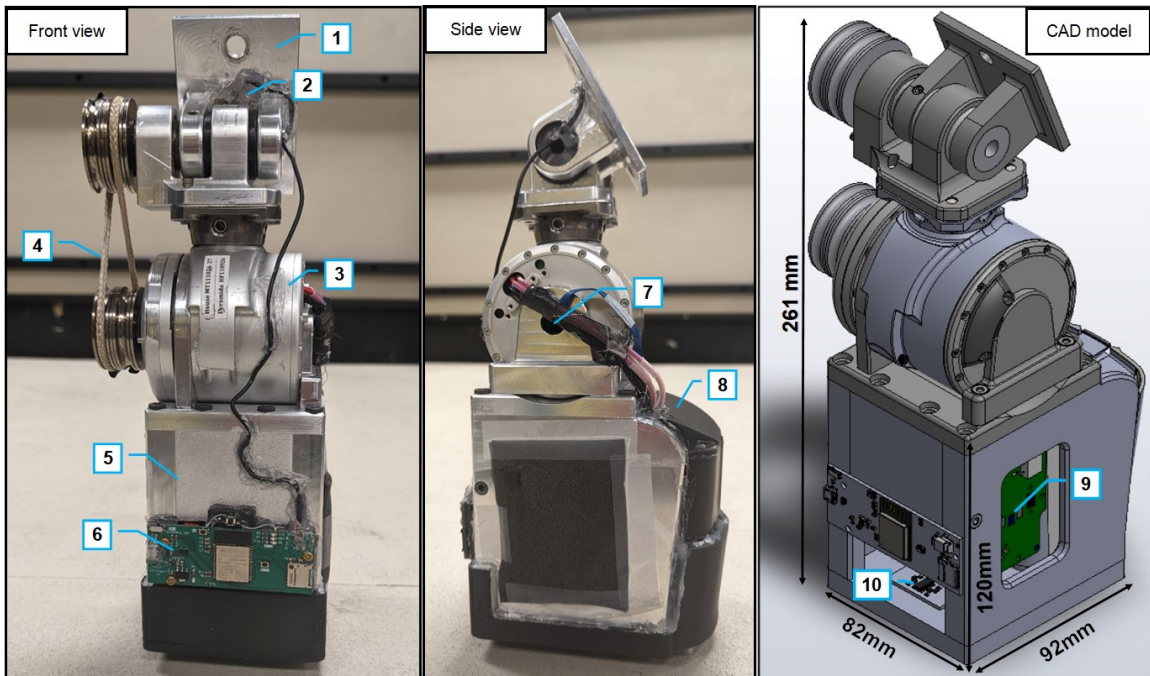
Front view, side view, and CAD model of Power Hip module. 1: joint to socket attachment plate, 2: pelvic IMU, 3: DC motor, 4: single axis cross-belt drive hip joint, 5: thigh chassis, 6: gait controller and data logger, 7: hip joint angle sensor and motor encoder, 8: battery, 9: motor driver and thigh IMU, 10: loadcell and ADC board.
